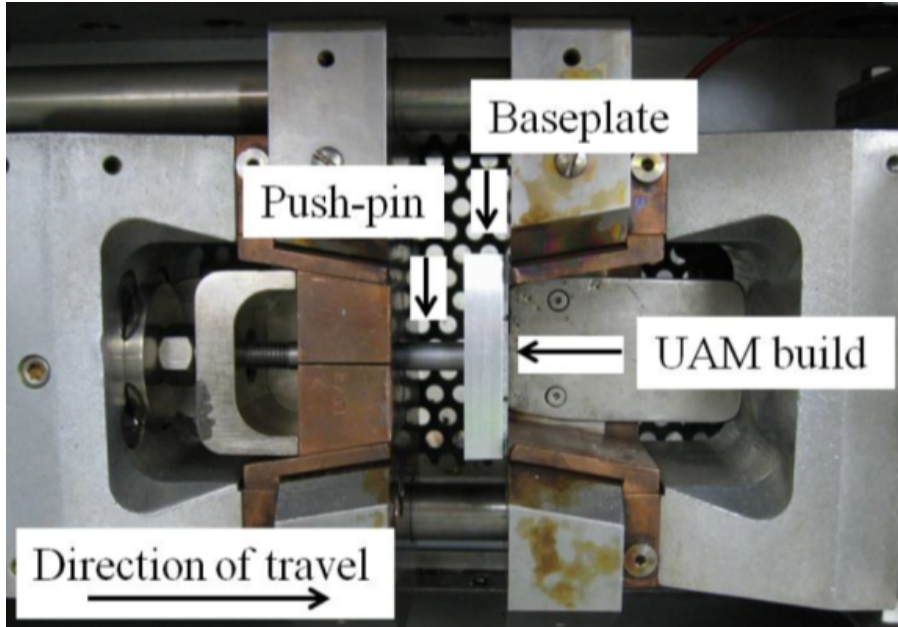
Push pin test for testing UAM welded layer bonding [34].
